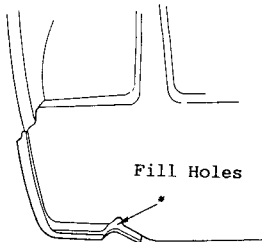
Sill and Sill Infill Bonding
